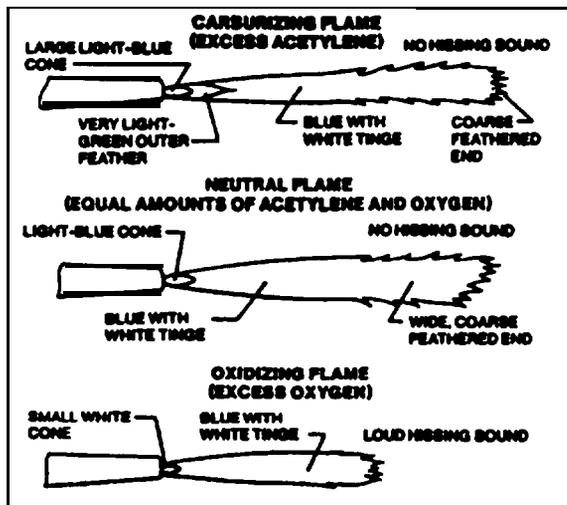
Basic gas-welding flames: Each has distinctive shape, color and sound. Neutral flame is the most used.
